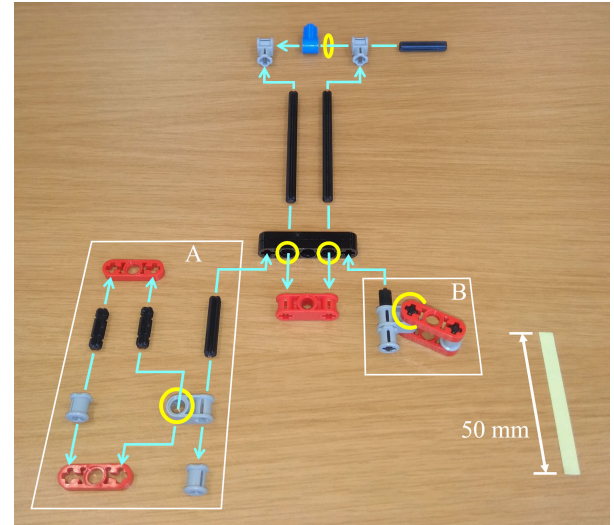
Fabrication process of the mechanical part of the gripper. (a) LEGO pieces were assembled. (b) The rod, hanging plates, pad, and power wires were connected. See text for details.
